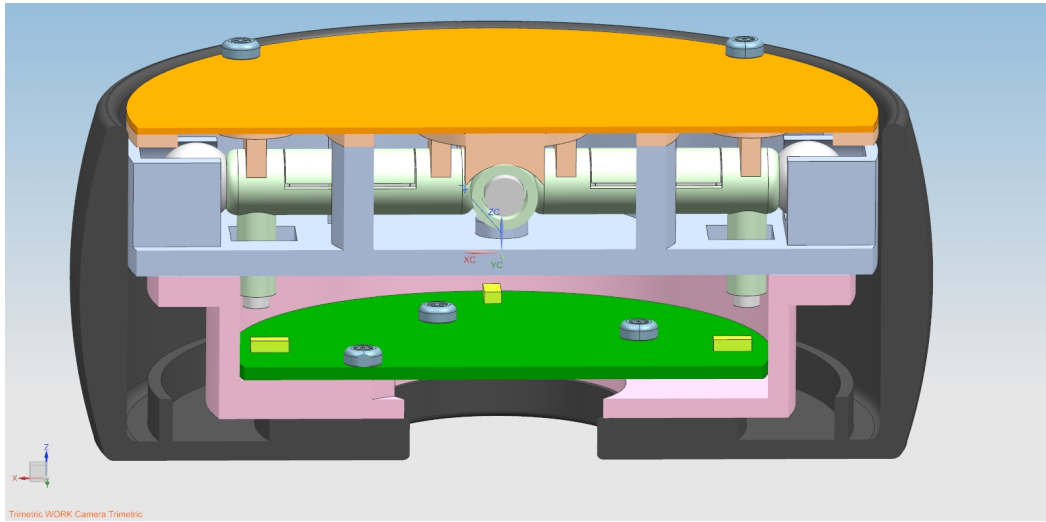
A knob with only magnet sticks and sensors. This knob can not rotate.
